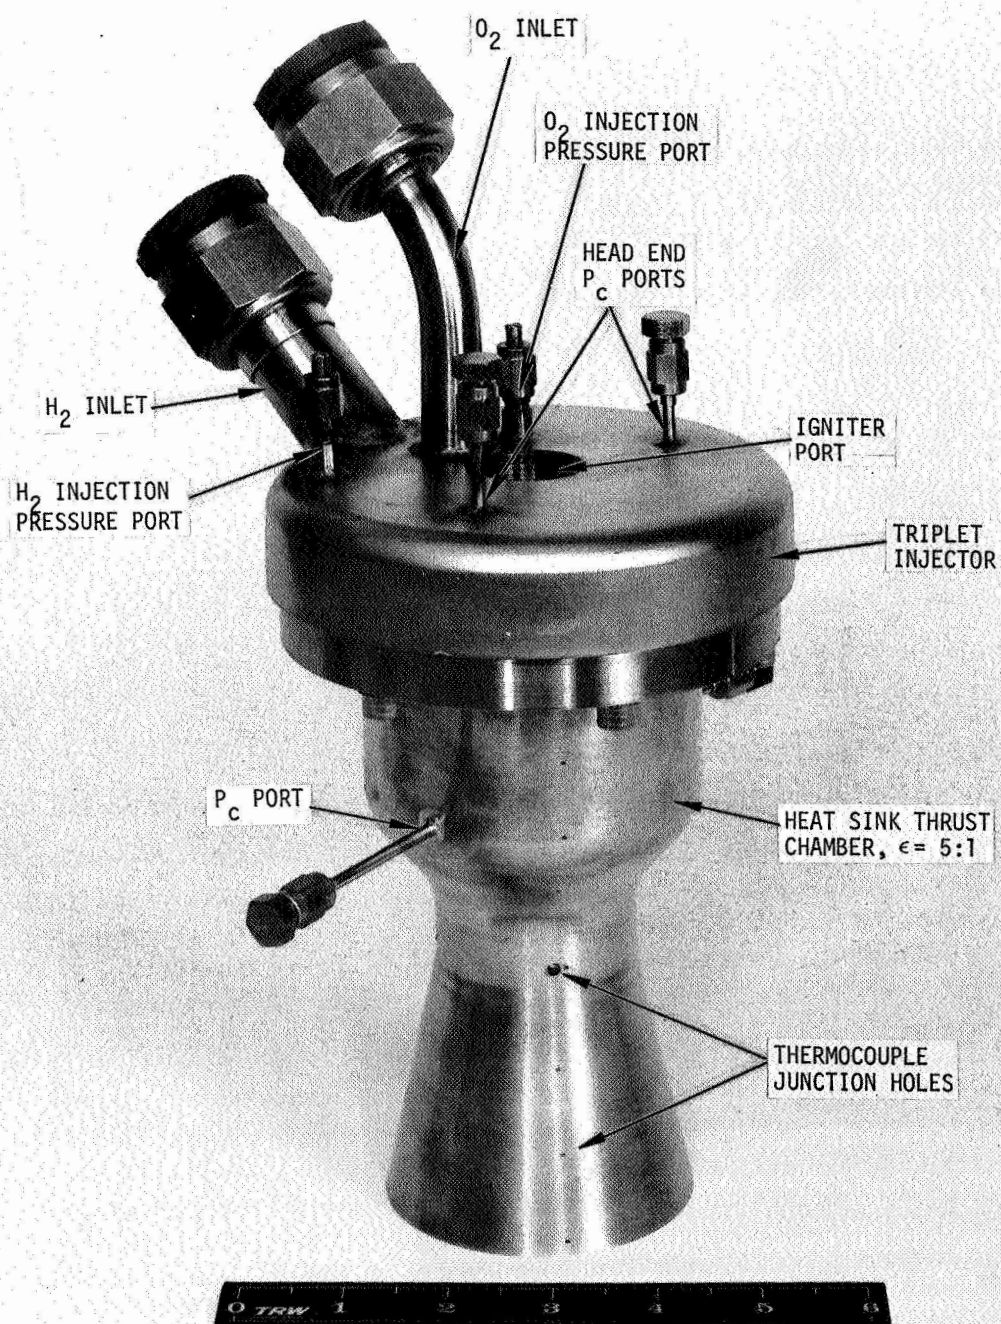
Assembly of Flightweight Triplet Injector and Heat Sink Thrust Chamber
